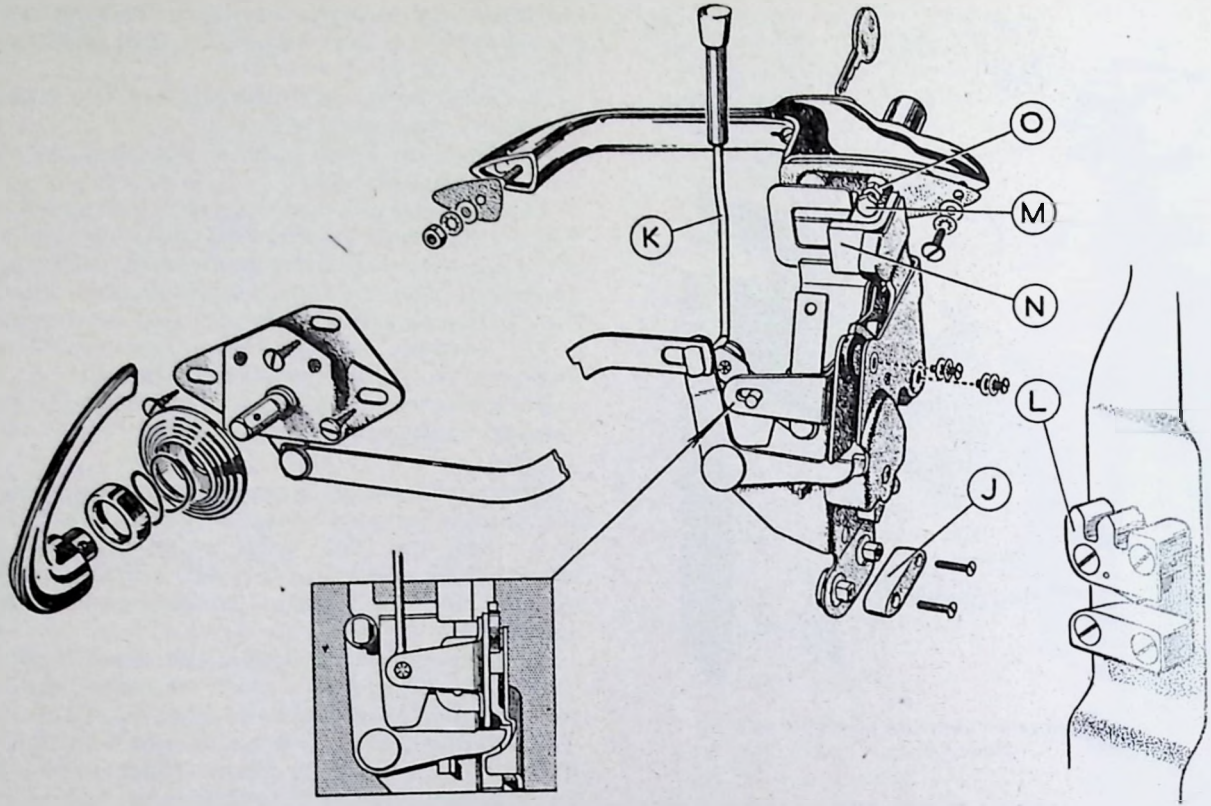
Components of the door lock mechanism. (Inset shows 'later type safety catch.)
